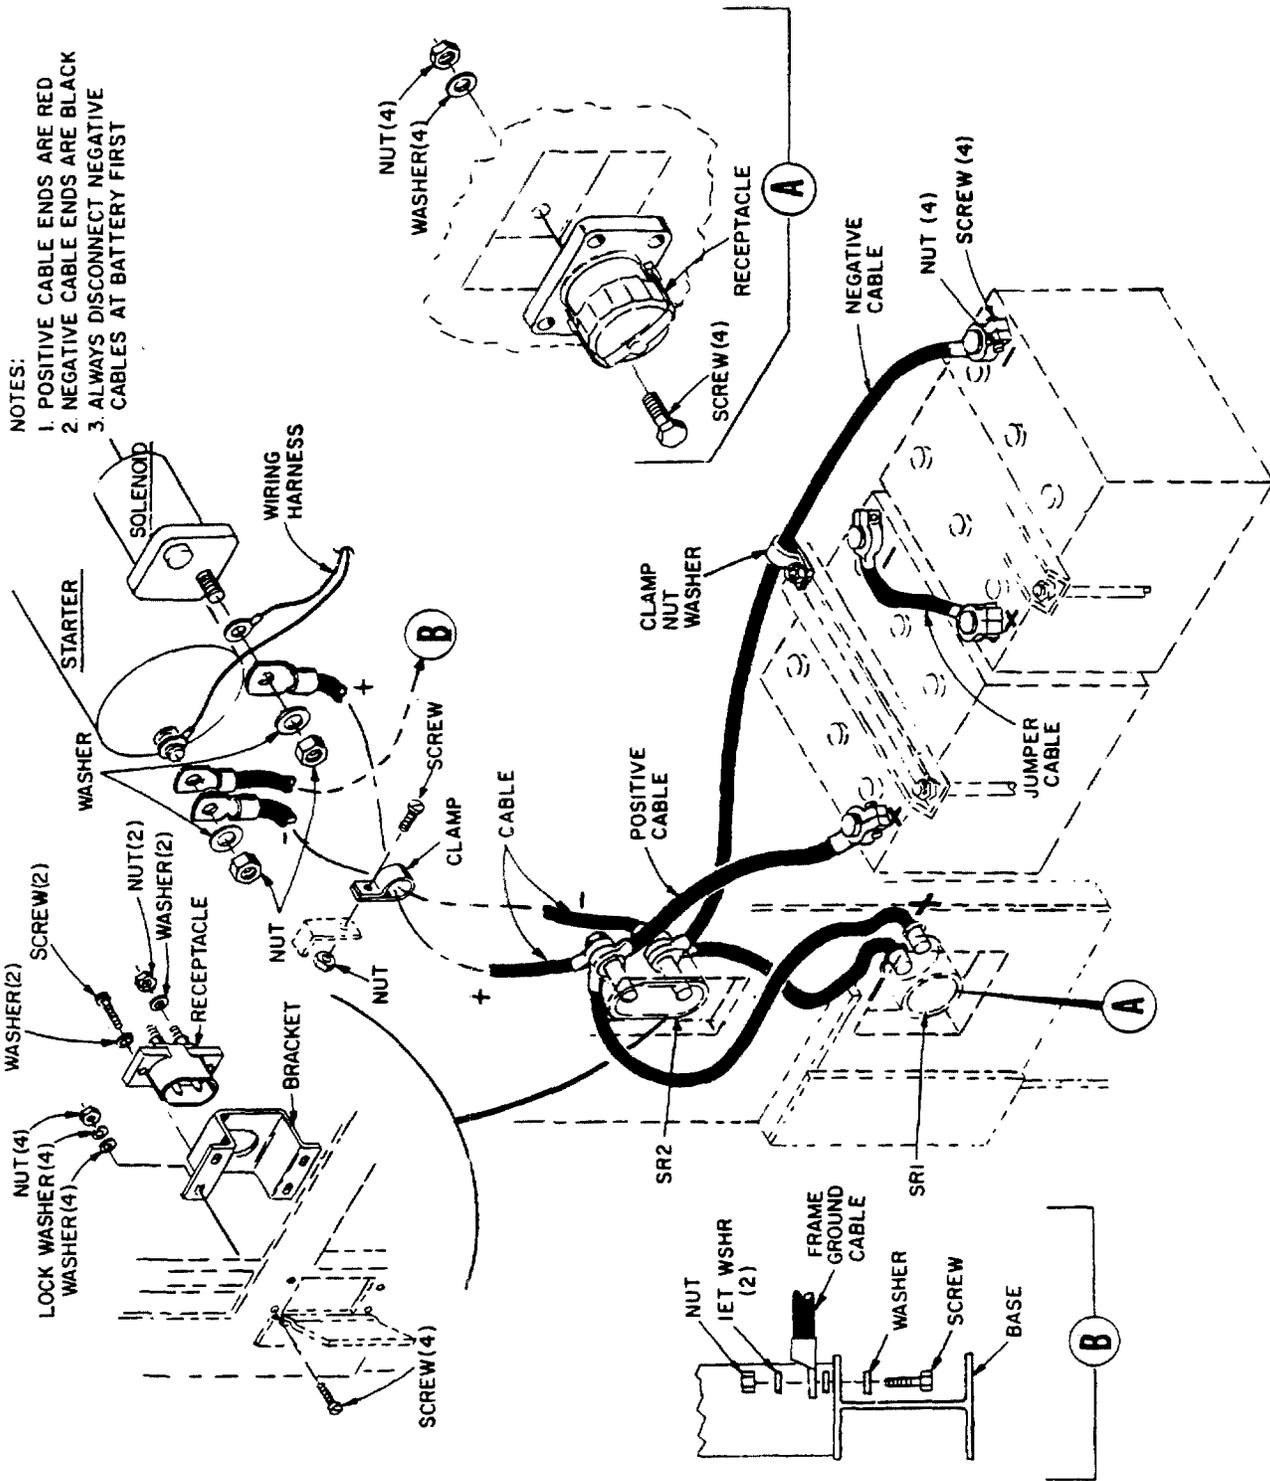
Battery Cables and Slave Receptacles, Removal and Installation
